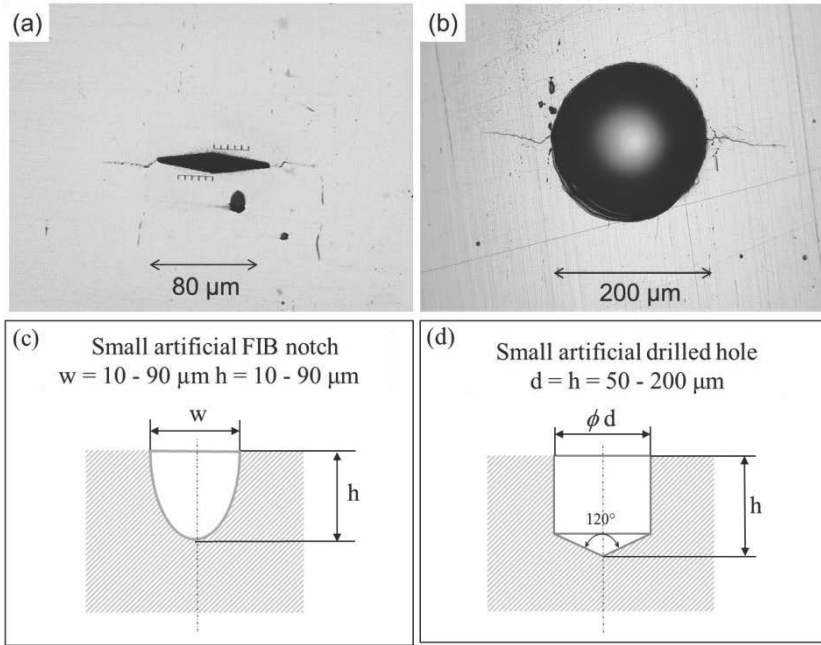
Examples of a) a FIB notch and b) a drilled hole being observed in-situ with a high-speed video microscope during testing, c) shows the cross-section dimensions of the FIB notch and d) the cross-section dimensions of the drilled hole. The measurements for both are given in μm .
